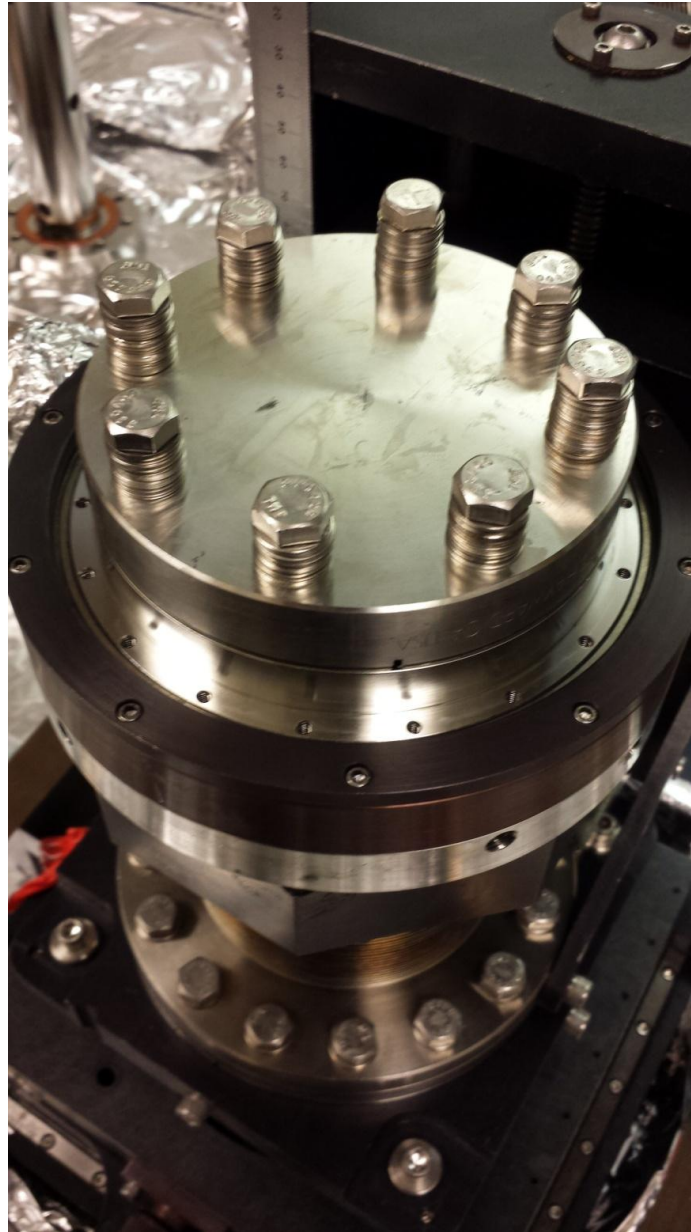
Image of the manipulator that shows the front face of the DPRF 450 being reassembled. The bearing cover ring was cleaned and installed using a new Viton gasket.
